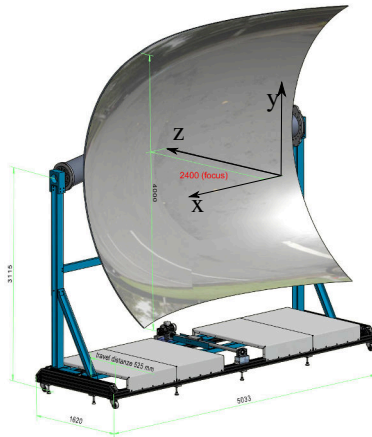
Parabolic mirror; design and drawing by A. Jekel. Dimensions in millimeter.
